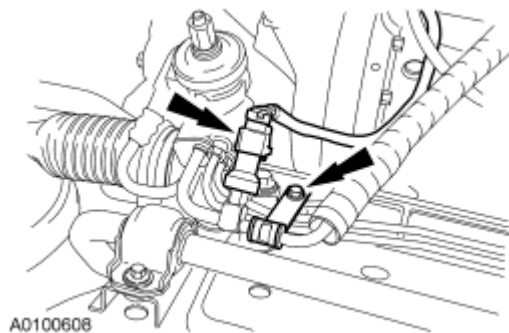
Locating Power Steering Pressure Tube Bracket Bolt & PSP Switch Electrical Connector
